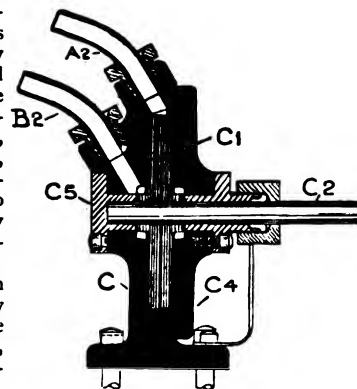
The Veeder Tachometer. — Sectional drawing of the motor-car type of indicator, in which the pump mechanism is entirely separate.
